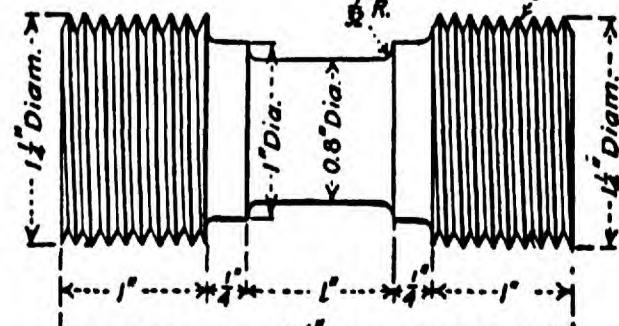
Standard Form of Test Specimen Required for Tension Tests of Gray-Iron Casting Material.
